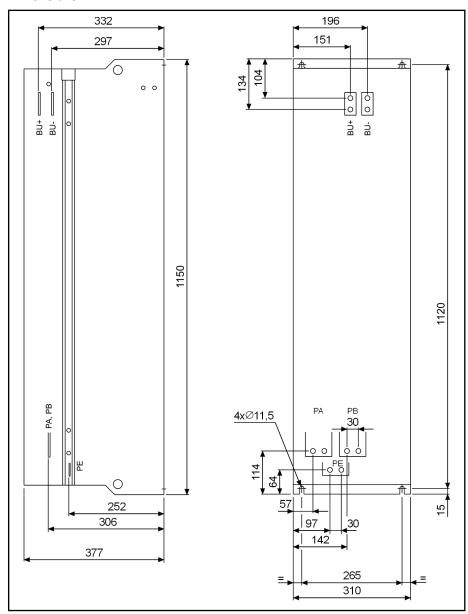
Dimensions Braking Unit HLT01.1A -400K
